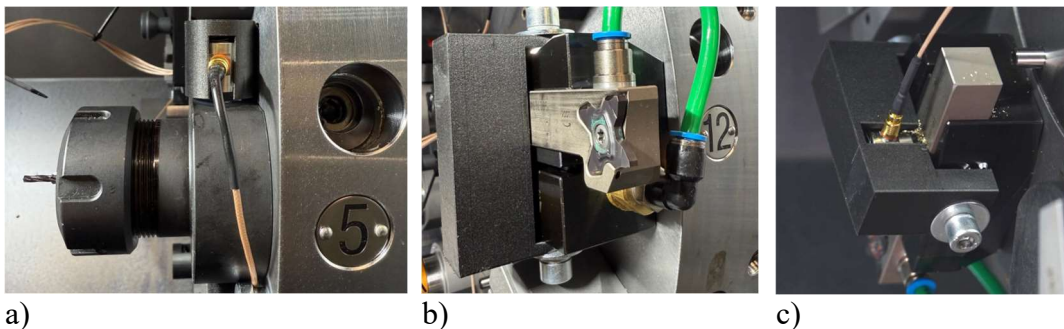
Sensor integration on tool holders a) Reamer tool holder (Position 5) b) Turning insert tool holder (Position 12) – front view with insert c) Turning insert tool holder (Position 12) – back view with sensor
